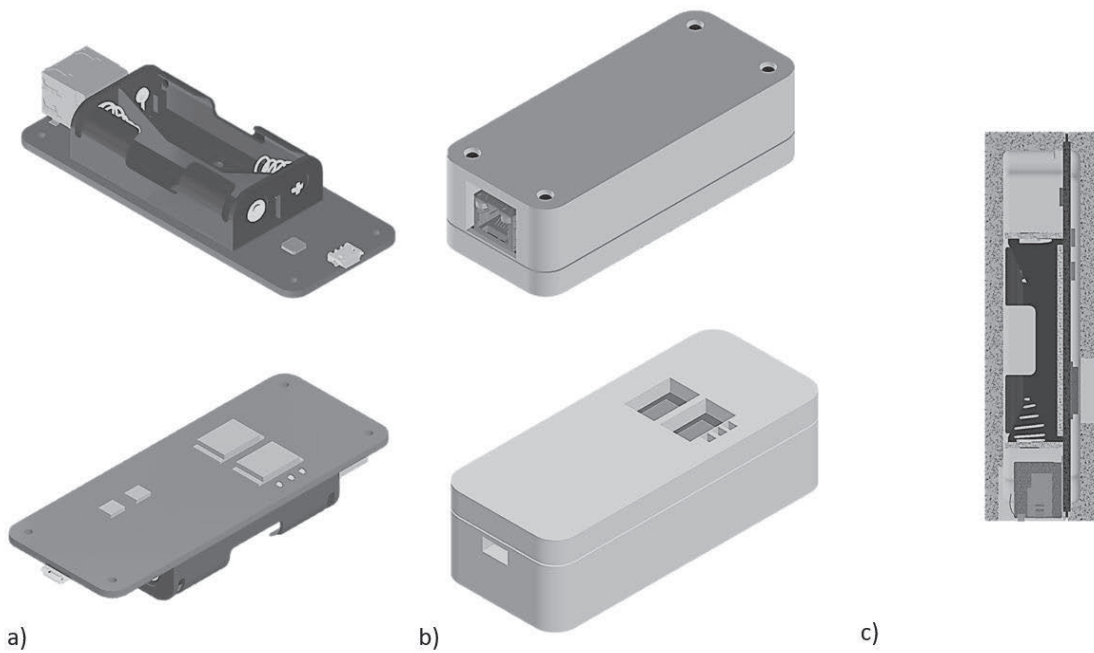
Test Case #1: a) PCB assembly b) PCB with enclosure c) Section view
